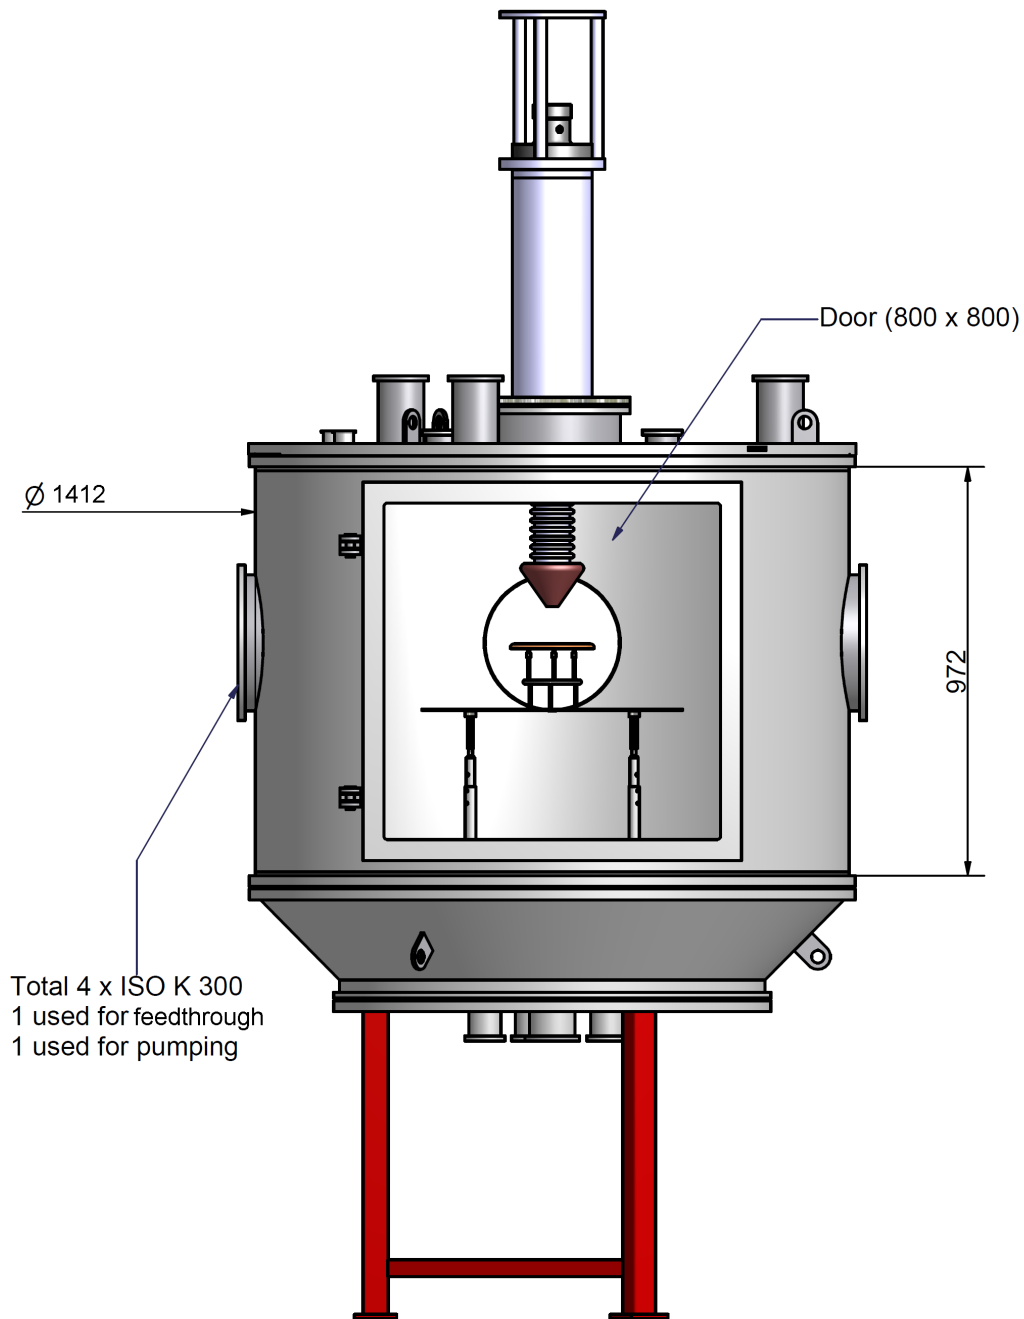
CAD image of HVtest. The dimensions in the sketch are given in millimeters.
